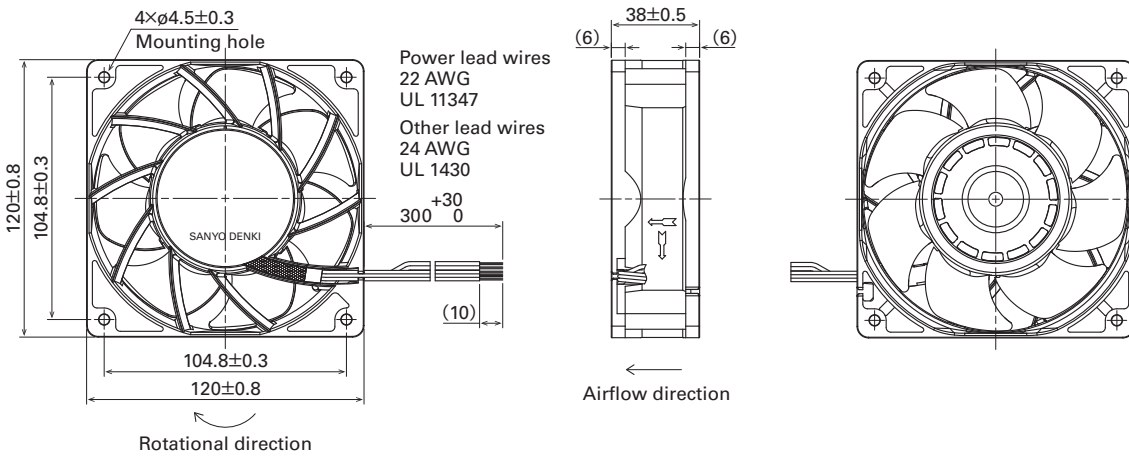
Dimensions of 120 × 120 × 38 mm *San Ace 120AD 9ADAW* type (Unit: mm)
